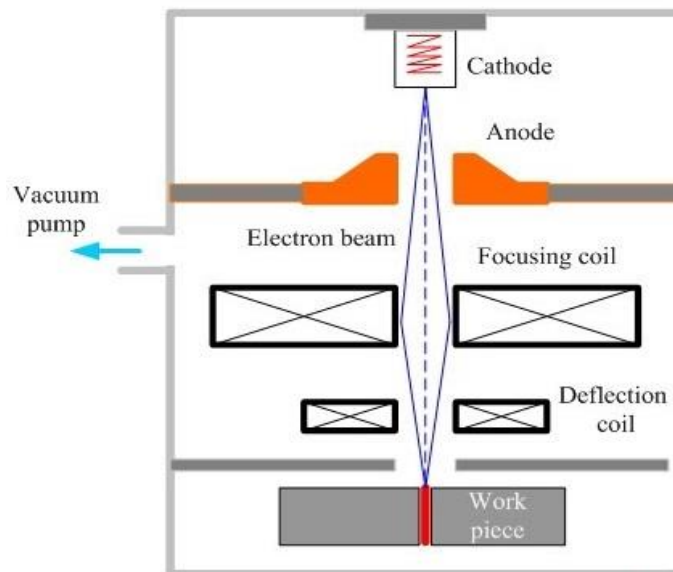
Structure of Electron Beam Welding (EBW) Method. (Substech.com, 2023).
